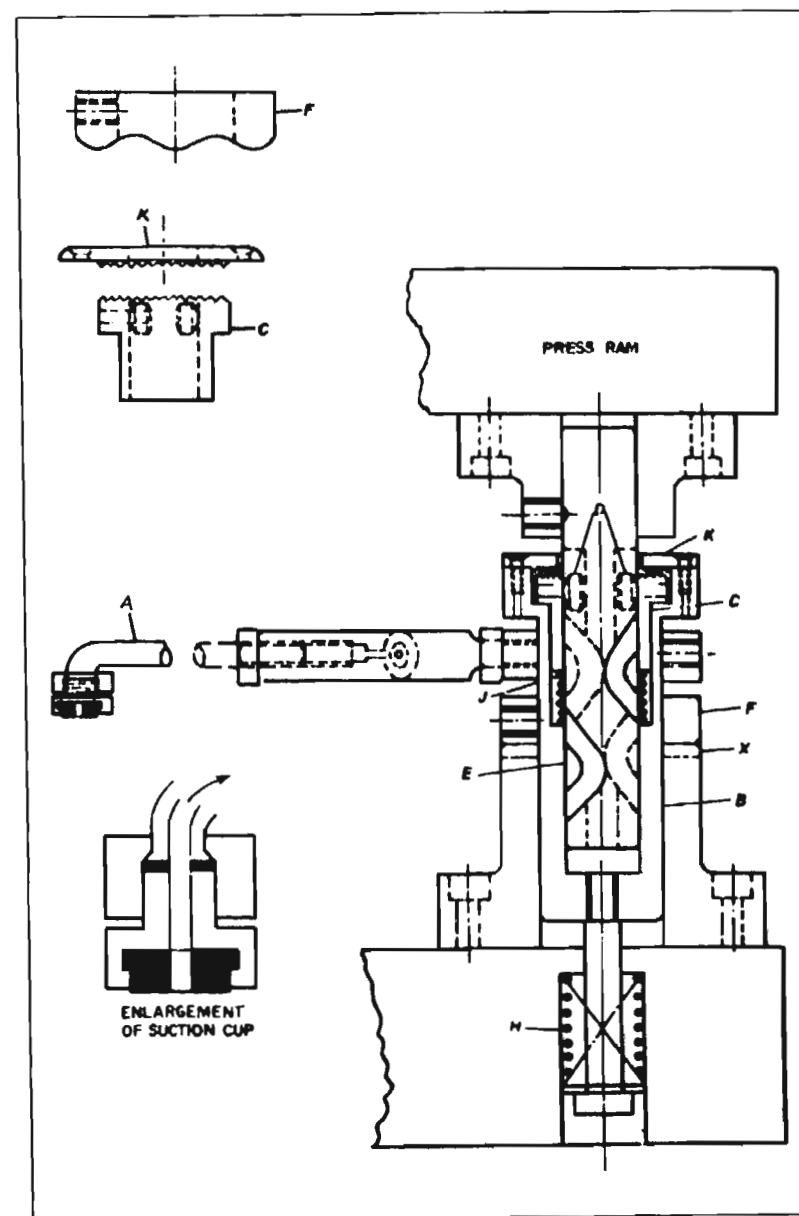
Swiveling vacuum arm designed for automatically transferring parts from one die to a second die.
